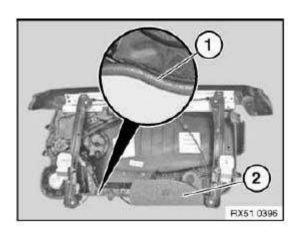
Identifying Door Seal And Crash Pad Courtesy of BMW OF NORTH AMERICA, INC.
